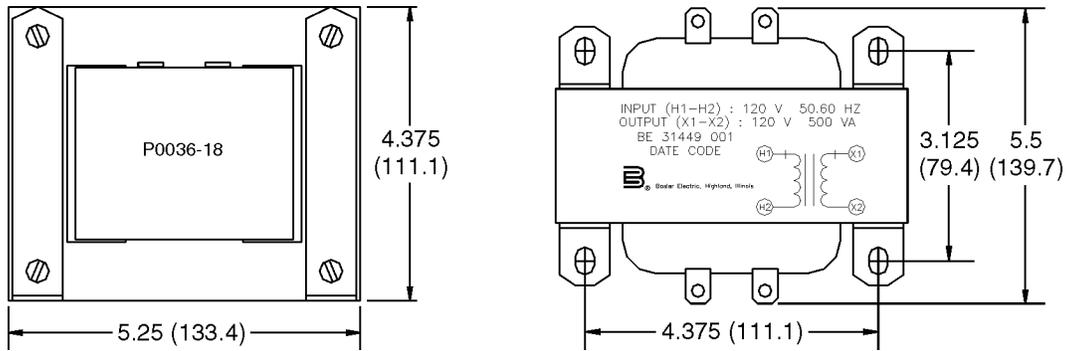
Isolation Transformer (BE31449001) Dimensions
